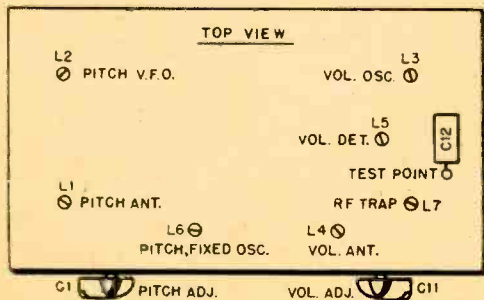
When aligning and making adjustments, refer to this diagram which shows the location of each of the coils and the front-panel controls.
